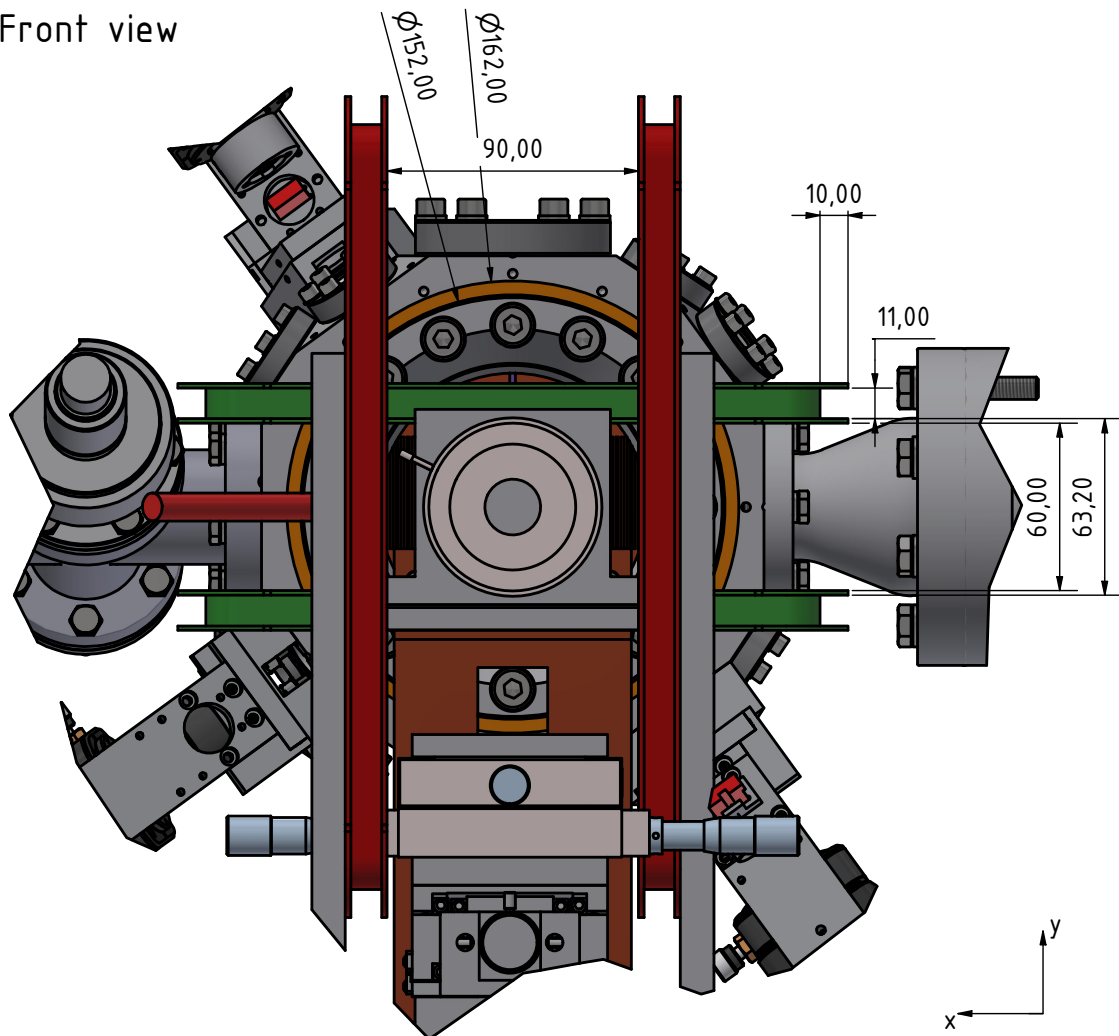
Drawing showing the front view of the vacuum chamber giving further dimensions for the compensation and bias field coils.
